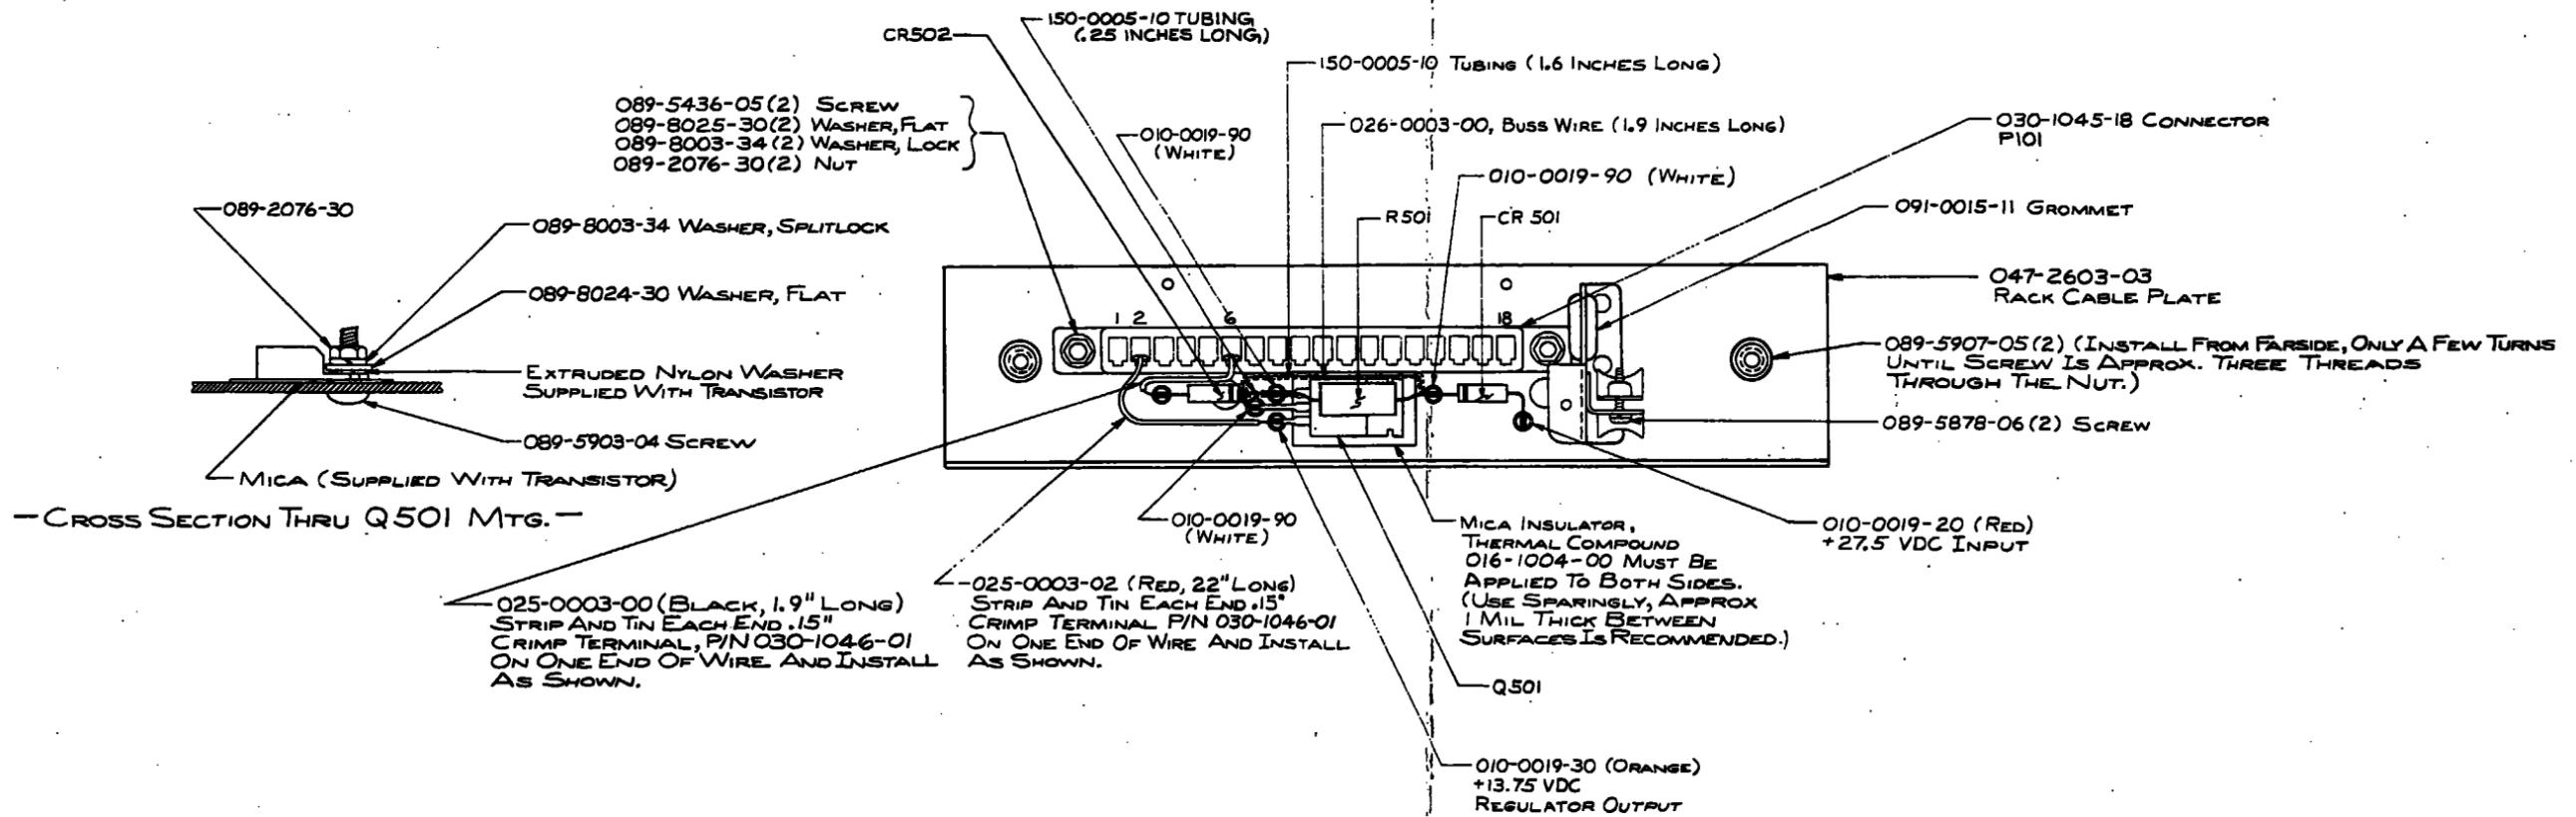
RACK CABLE PLATE SUB-ASSEMBLY
